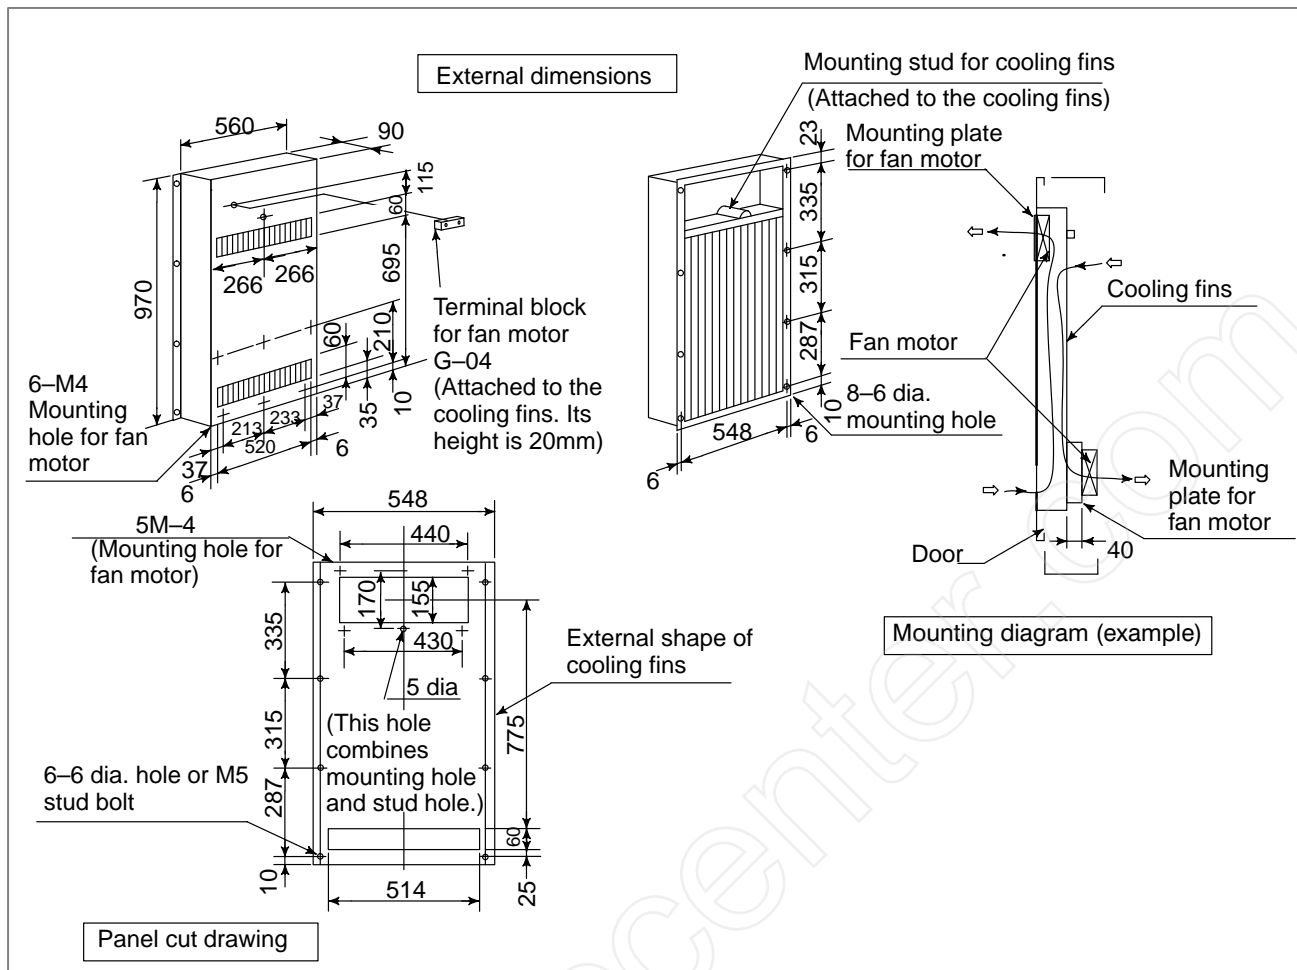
(e) External dimension and mounting method of cooling fin C (A02B-0053-K305)
